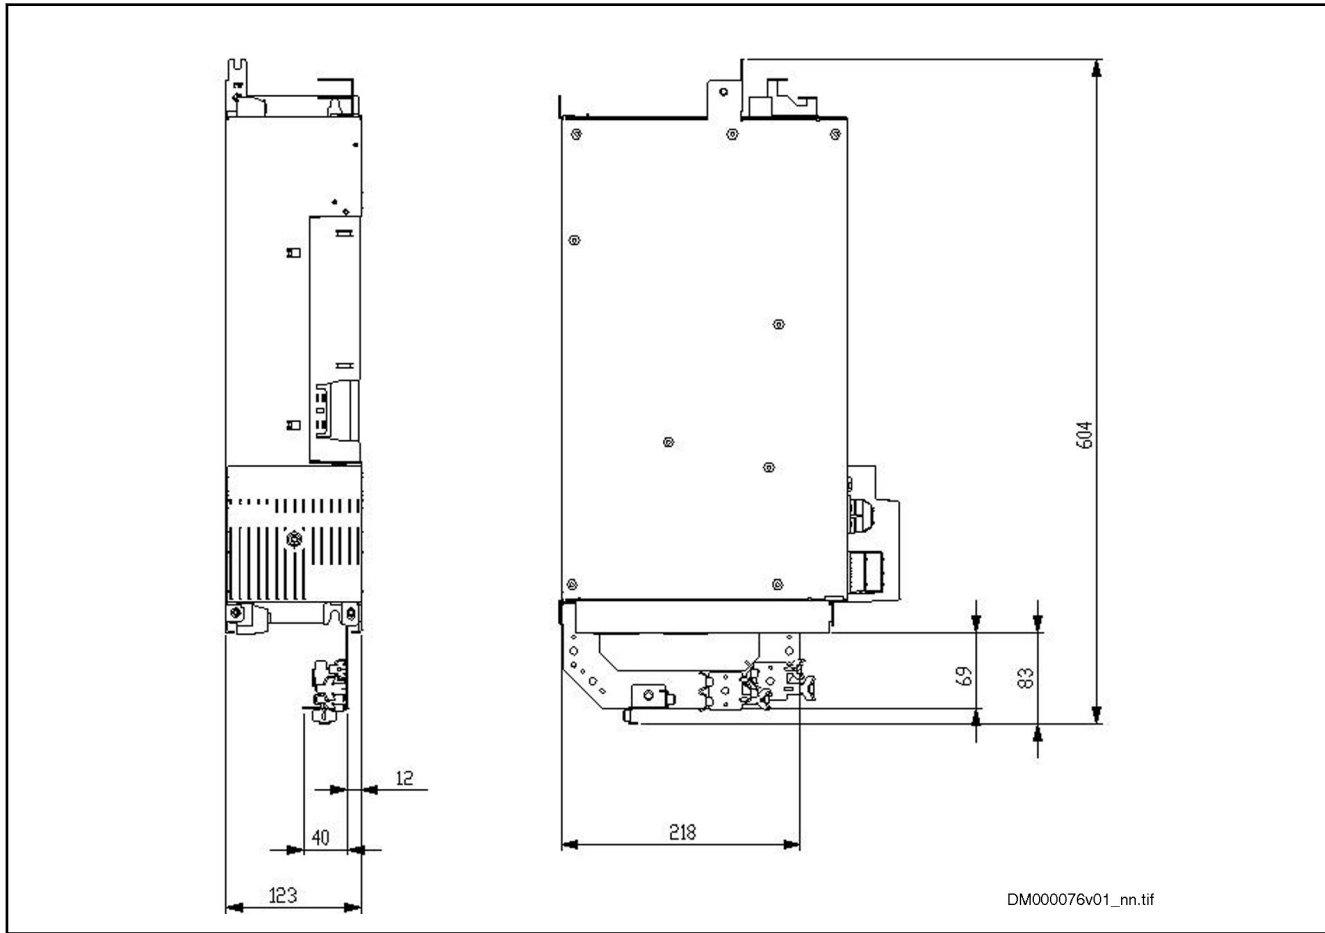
Dimensional drawing HCS03.1E-W0070 with HAS02
